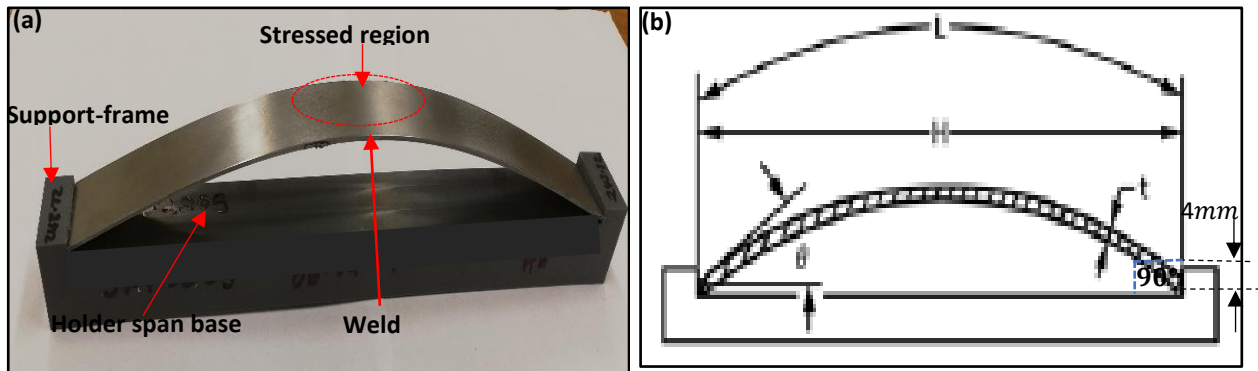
(a) Bent beam loading frame with the loaded sample.
